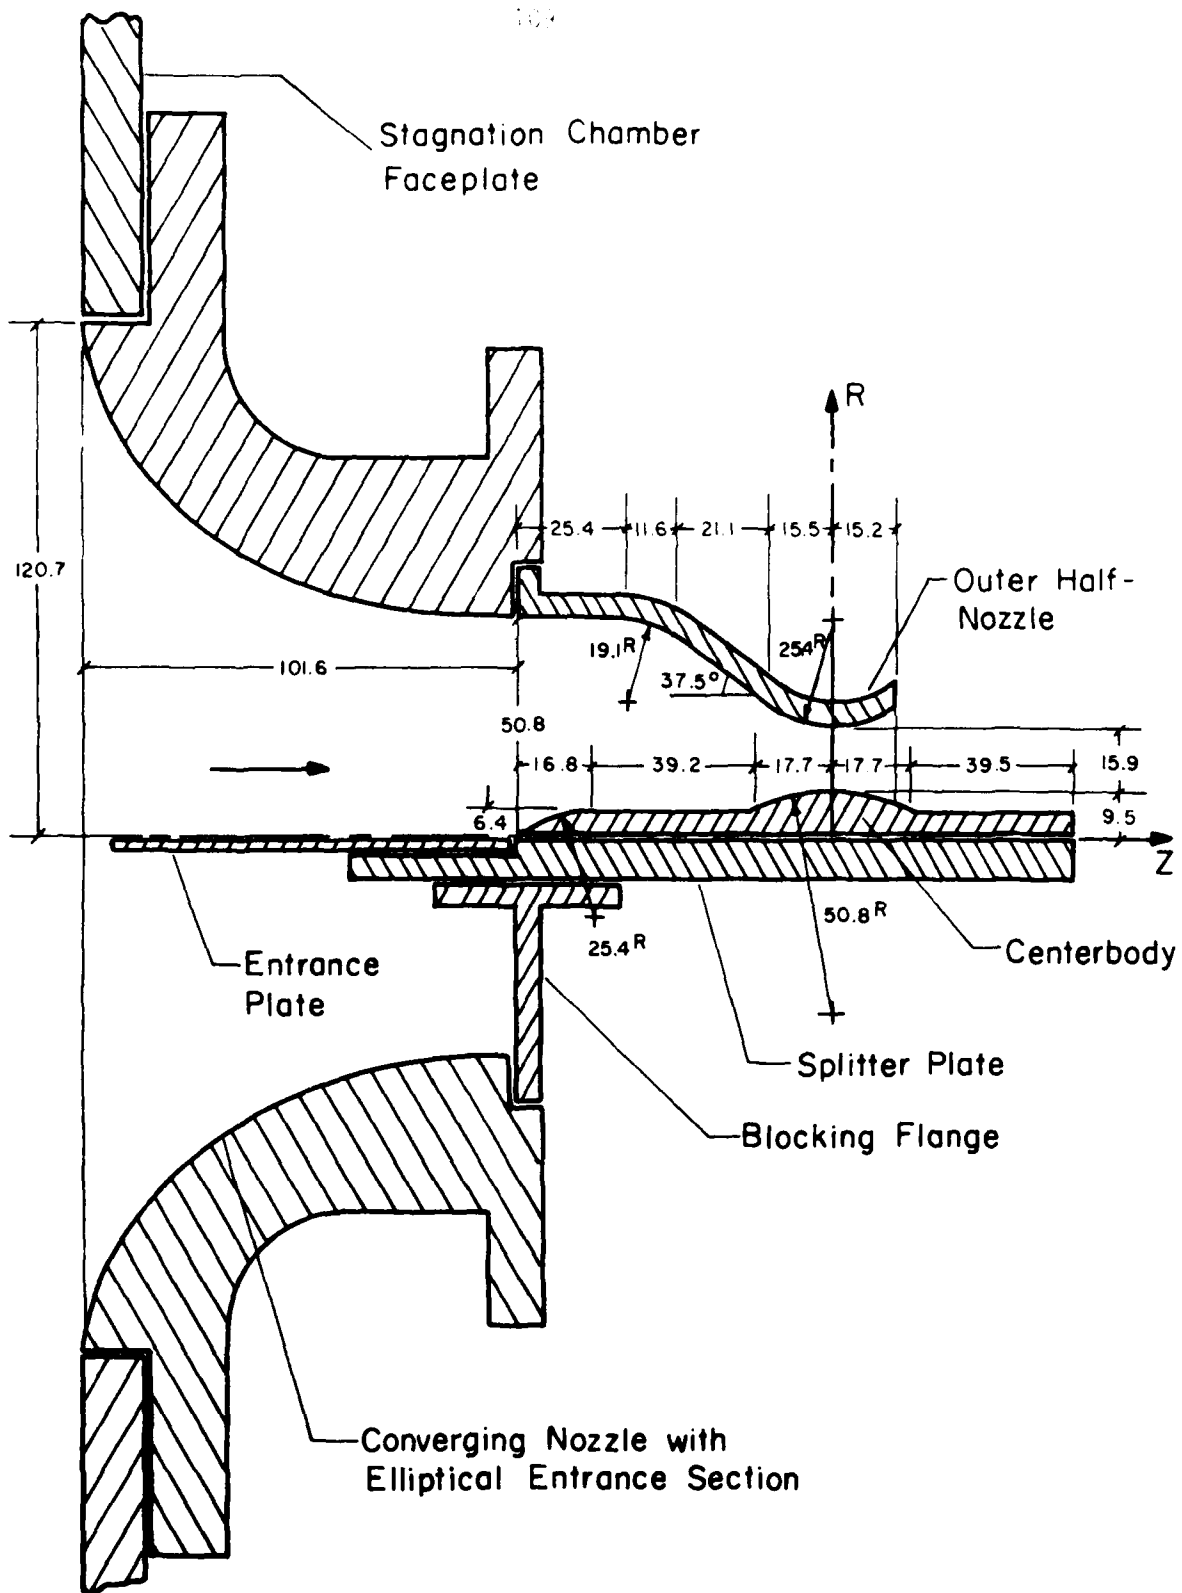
Half-section drawing of annular axisymmetric experimental configuration; all dimensions are in millimeters
